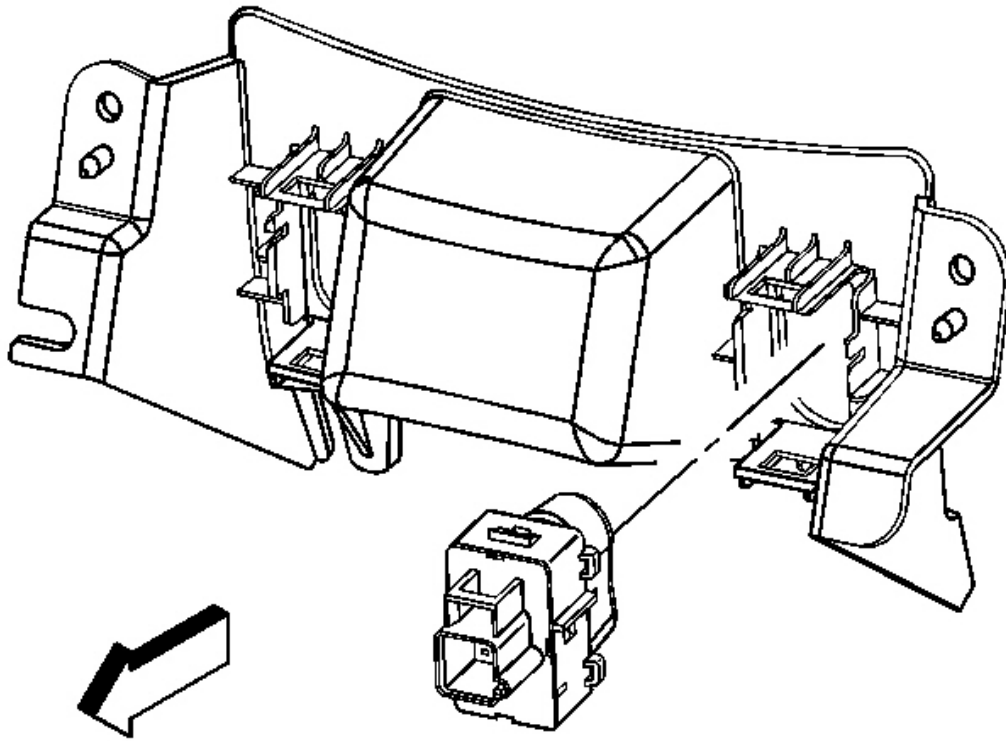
View Of Front (Driver Side) Heated Seat Switch
